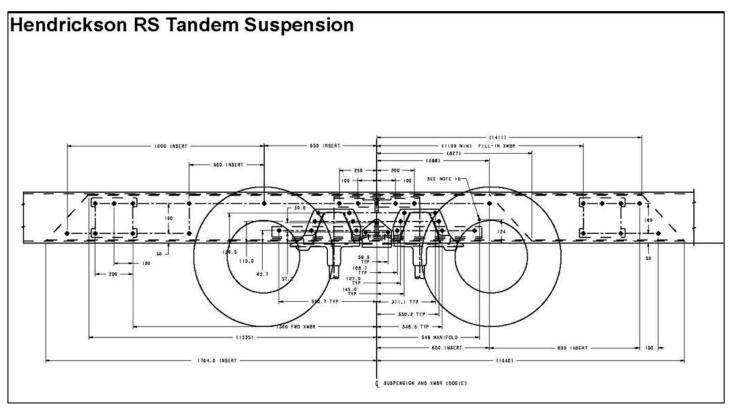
Hendrickson RS Tandem Frame Drilling (Dimensions In Millimeters)
